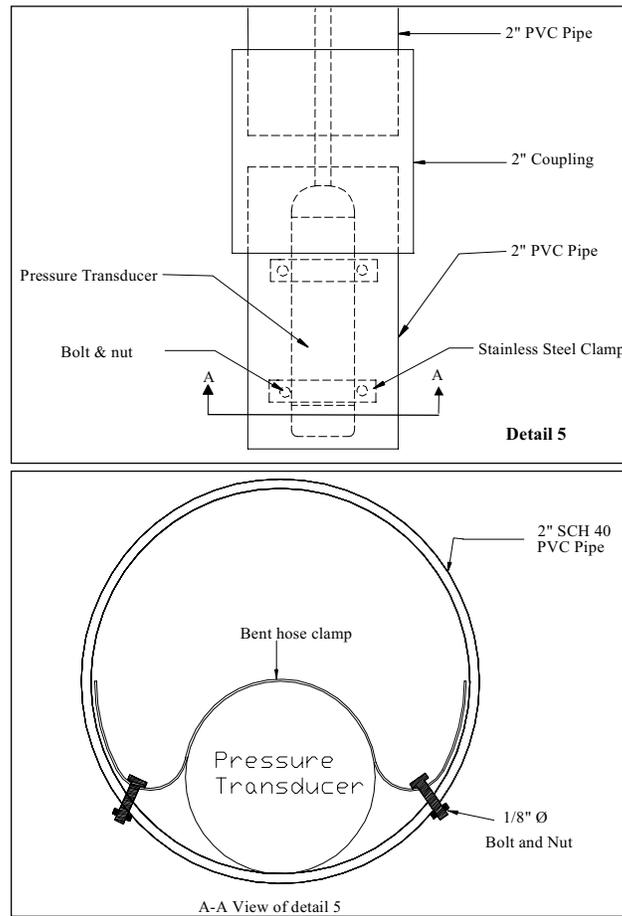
Schematics of the pressure transducer assembly (Detail 5)
